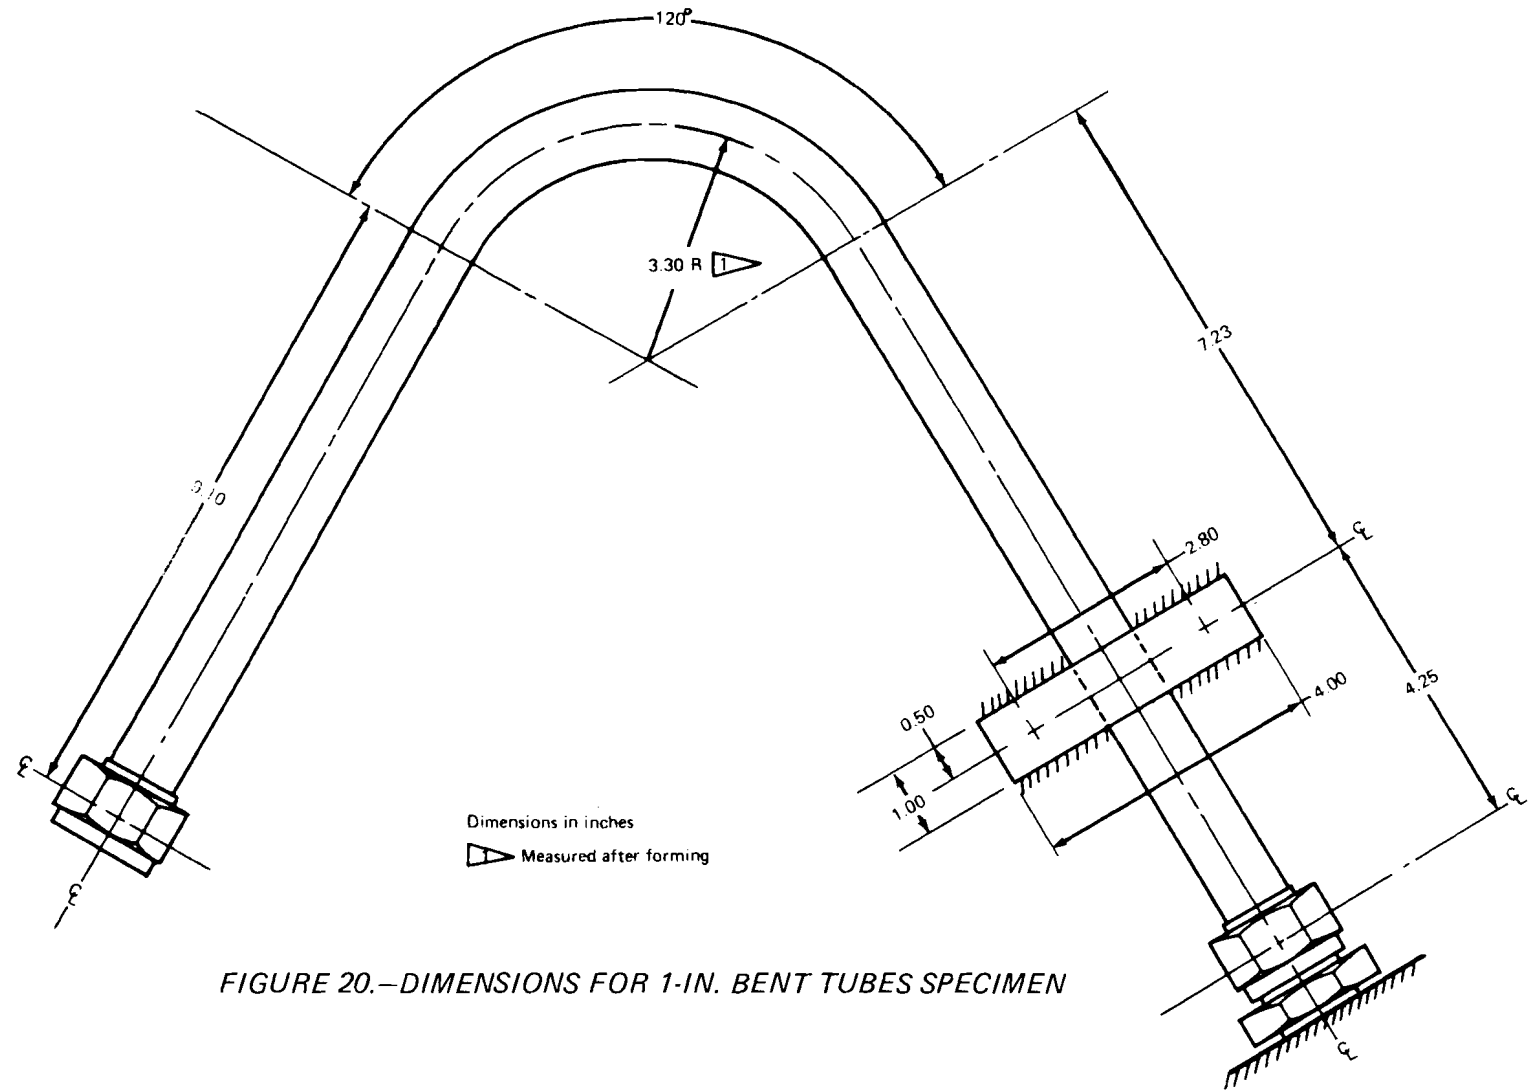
DIMENSIONS FOR 1-IN. BENT TUBES SPECIMEN
